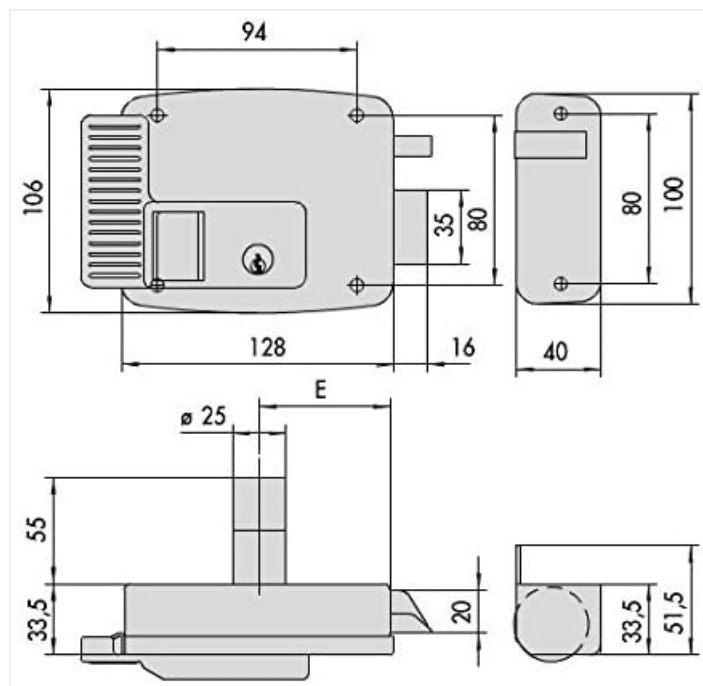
Technical drawing showing the dimensions of the Cisa 11931.70.3 electric rim lock. Key measurements include overall width (94mm), height (106mm), depth (40mm), and bolt projection. All dimensions are in millimeters.
